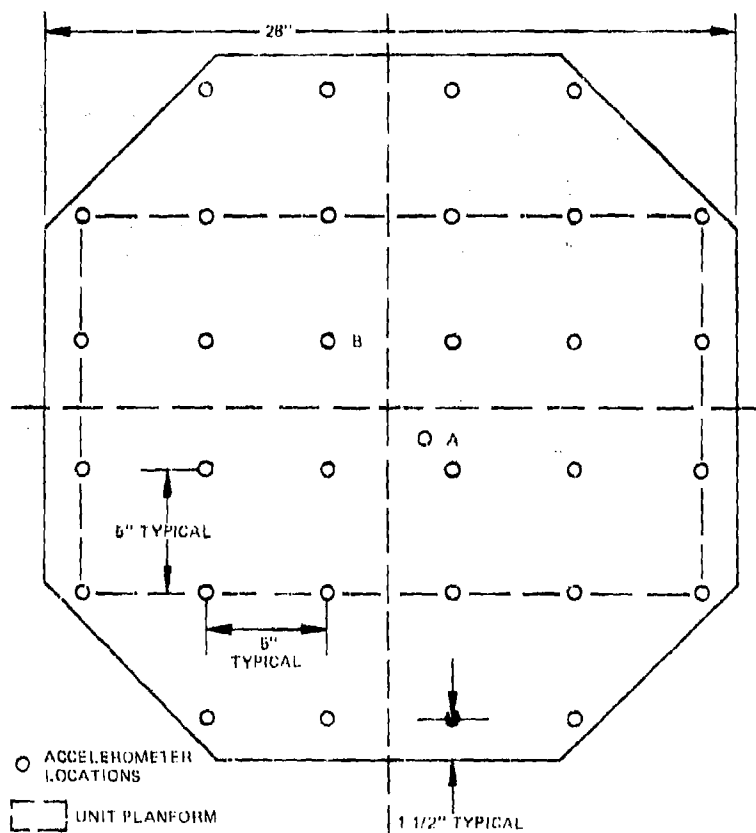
Flat plate fixture, 3-1/2-in.-thick aluminum.
